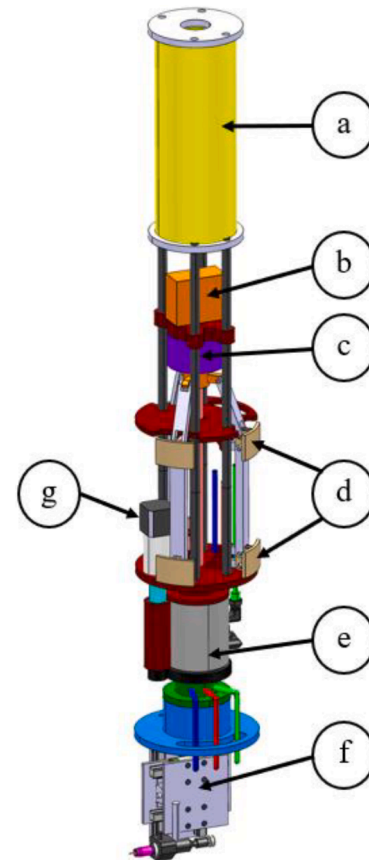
Welding system for in-bore operation and main components: (a) drum for filler wire, (b) wire feeder, (c) electric motor for pushing the friction pads against the pipe inner wall, (d) supporting unit (6 friction pads), (e) rotary manifold for electric supply, cooling water and assisting gas, (f) motion system for radial and axial translation of the torch, (g) electric motor for axial rotation of the welding torch. The design of the nozzle for the filler wire is under development and is not depicted in this figure.
